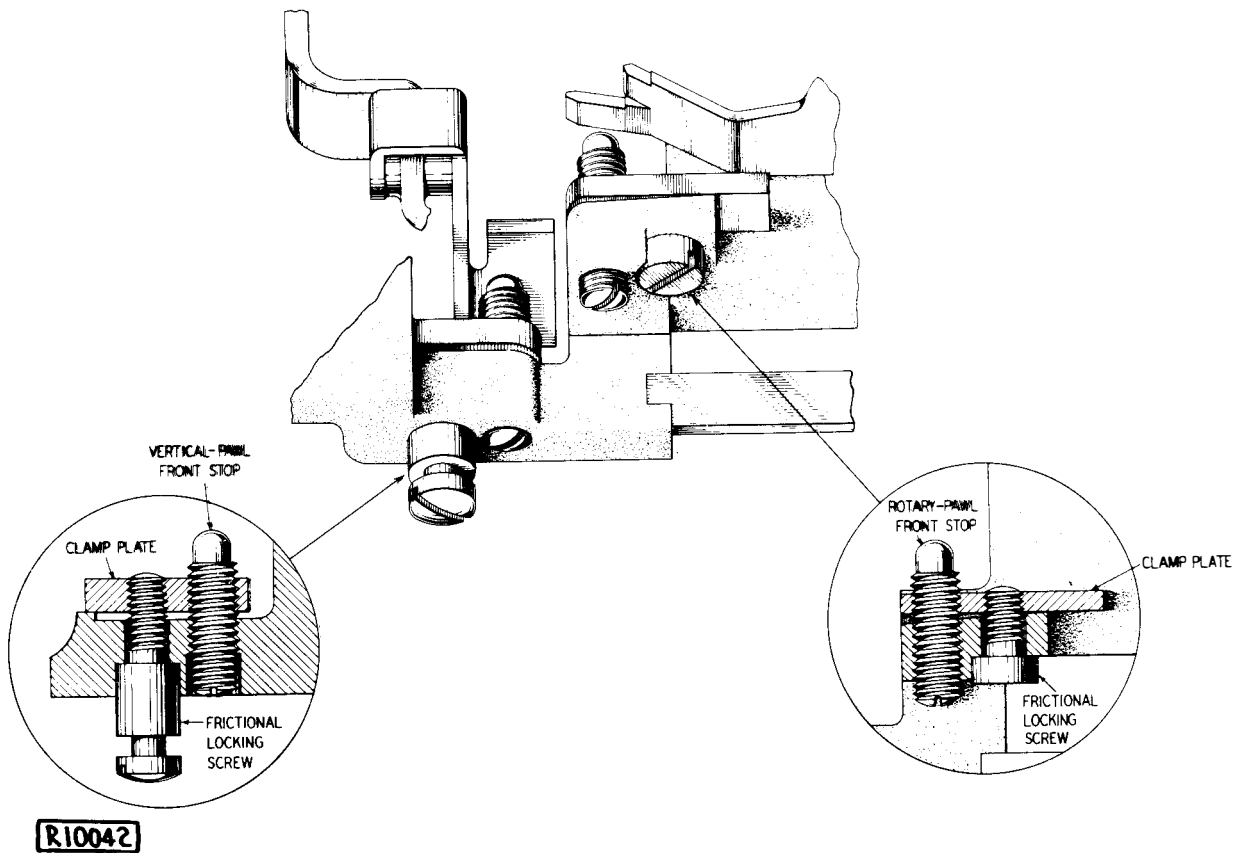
Use of Friction-Locked Adjusting Screws for Vibration Protection on Selectors.
